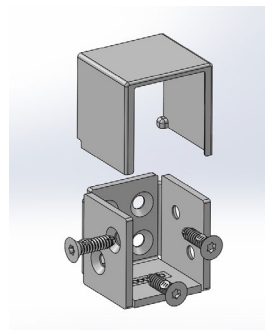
CB-04 COLLAR BRACKET AND INSTALLATION DETAIL FOR THE Fe²⁶ TRADITIONAL RAIL
